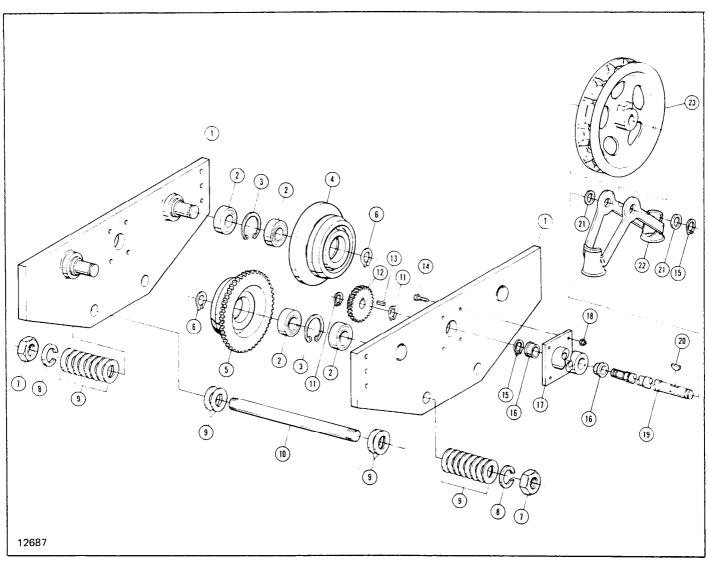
Hand Geared Rigid Mount Trolley Assembly. (6-1/2" & 8" ϕ Wheels.)
